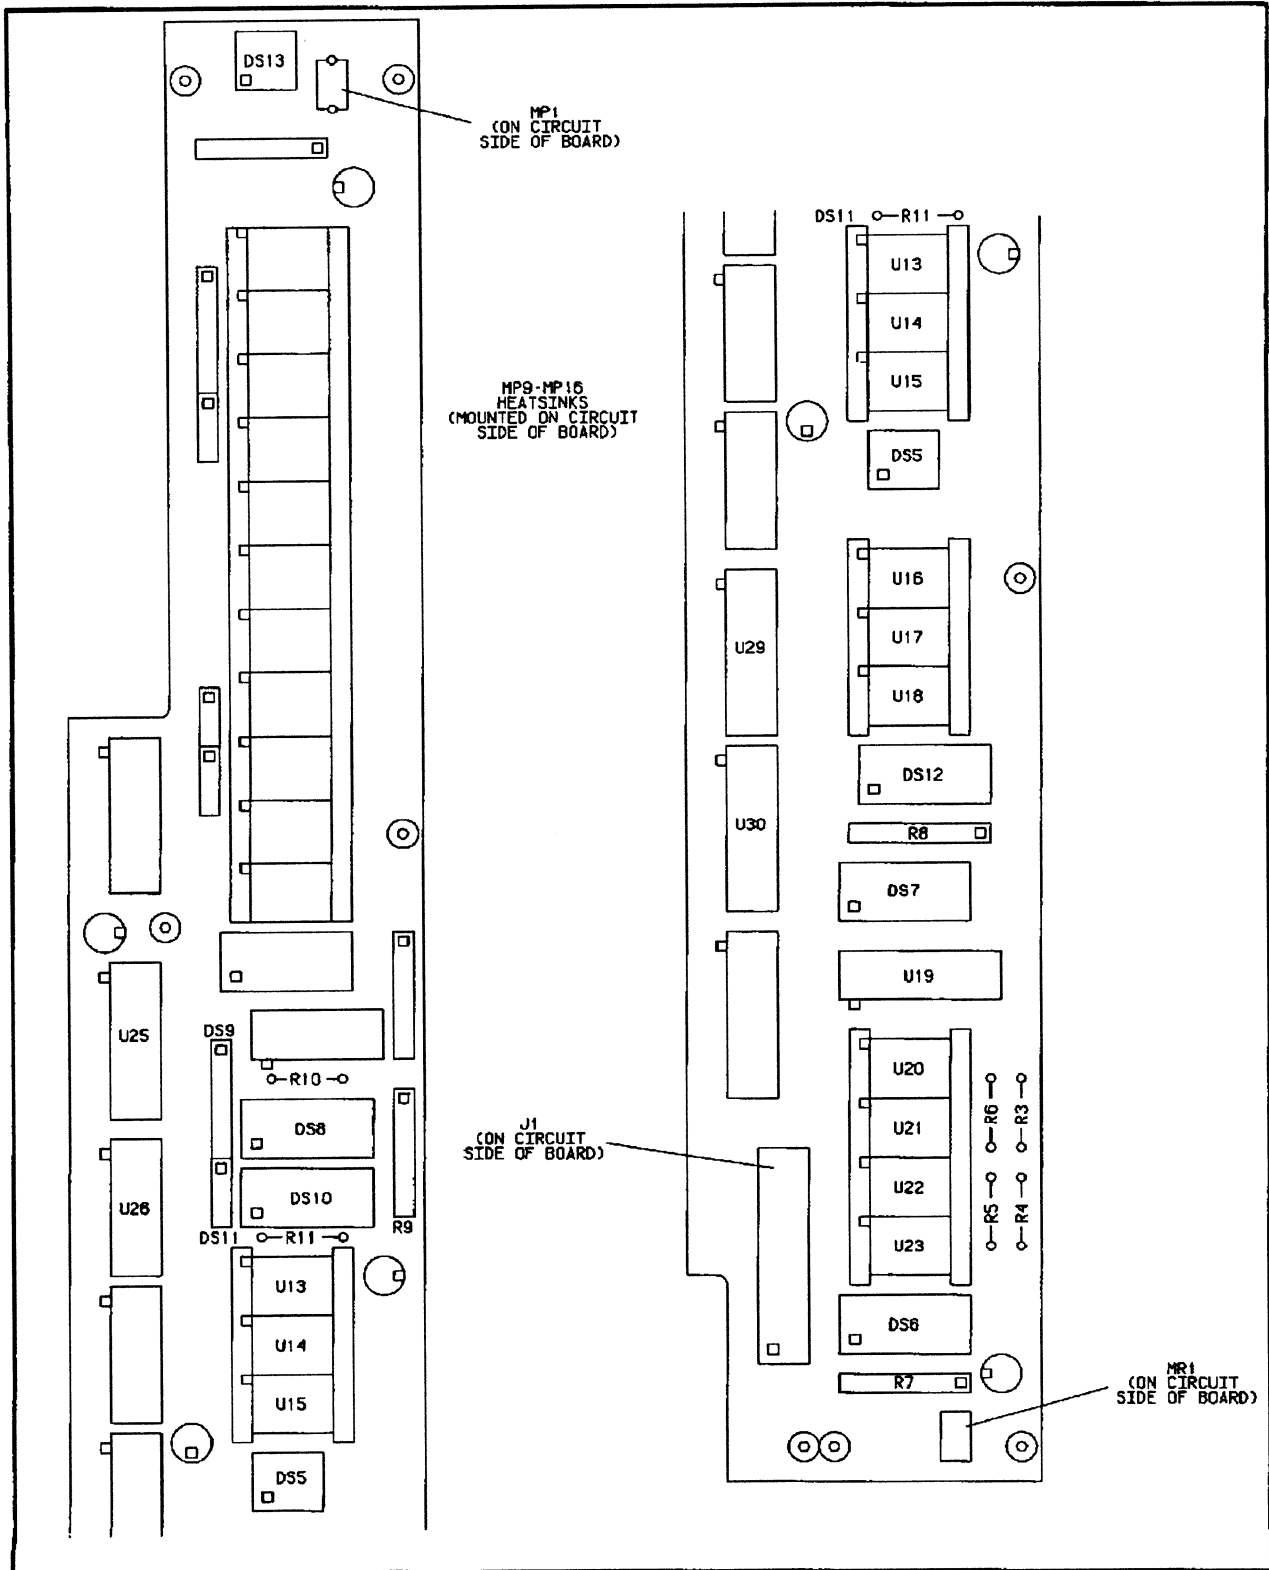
P/O A1A1 Display Assembly Component Locator
